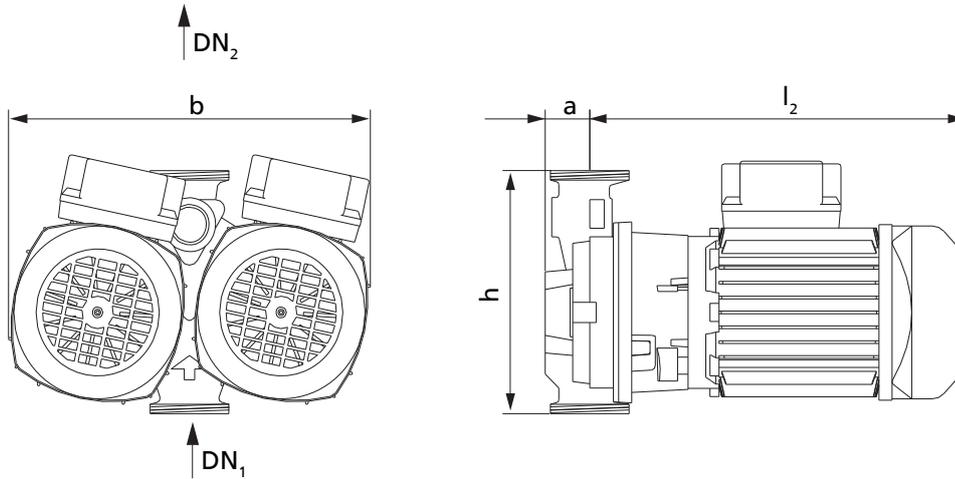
Dimensions of screw-ended pump set, size 032-032-080
